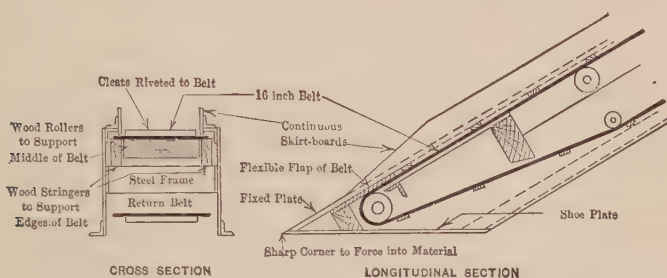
"Scoop" Loader, Bottom end and Cross-section. (Portable Machinery Co.)
